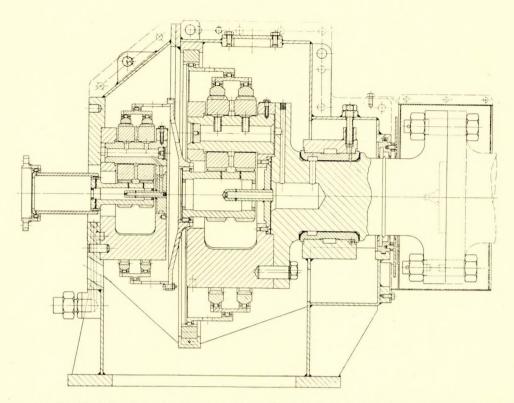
Double-reduction epicyclic gear with double-helical teeth (780 h.p., 16,500/600 r.p.m.)
